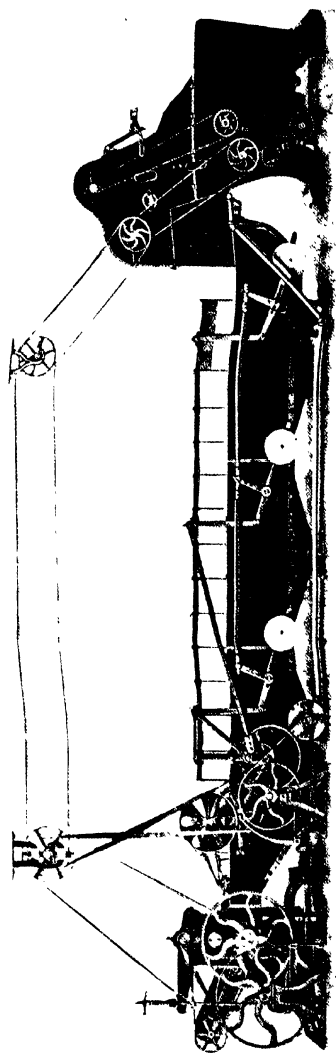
Scouring Machine, Rake Type (C. G. Sargent).
